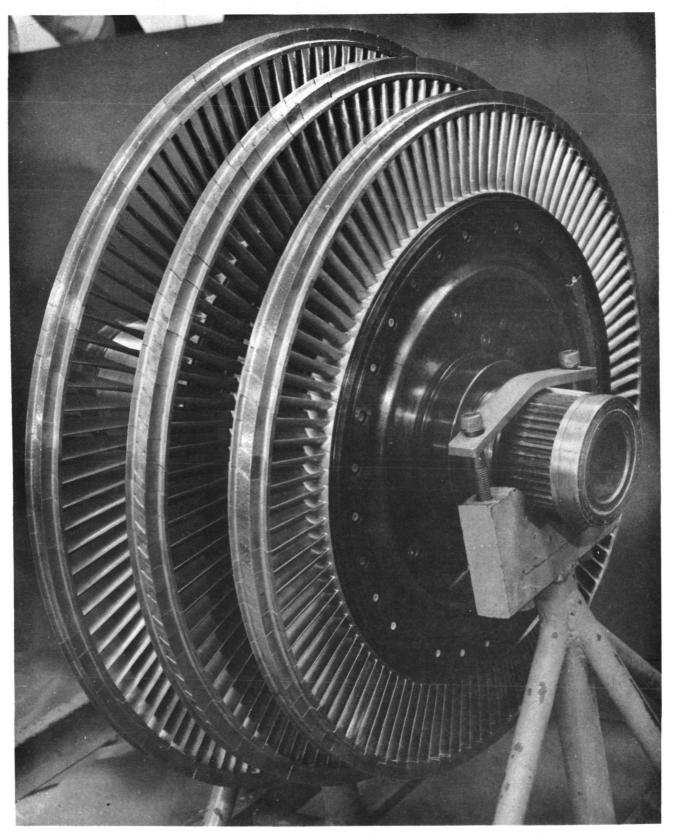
Three-Stage Turbine Plain Blade Rotor Assembled.
